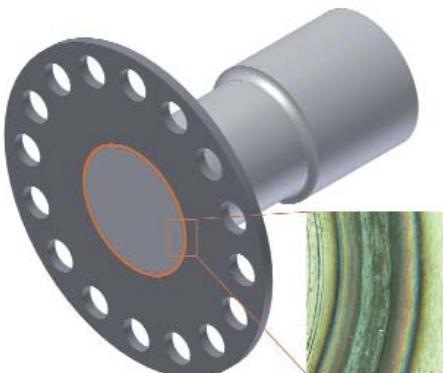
Model test component (shaft-disk) with weld seam
